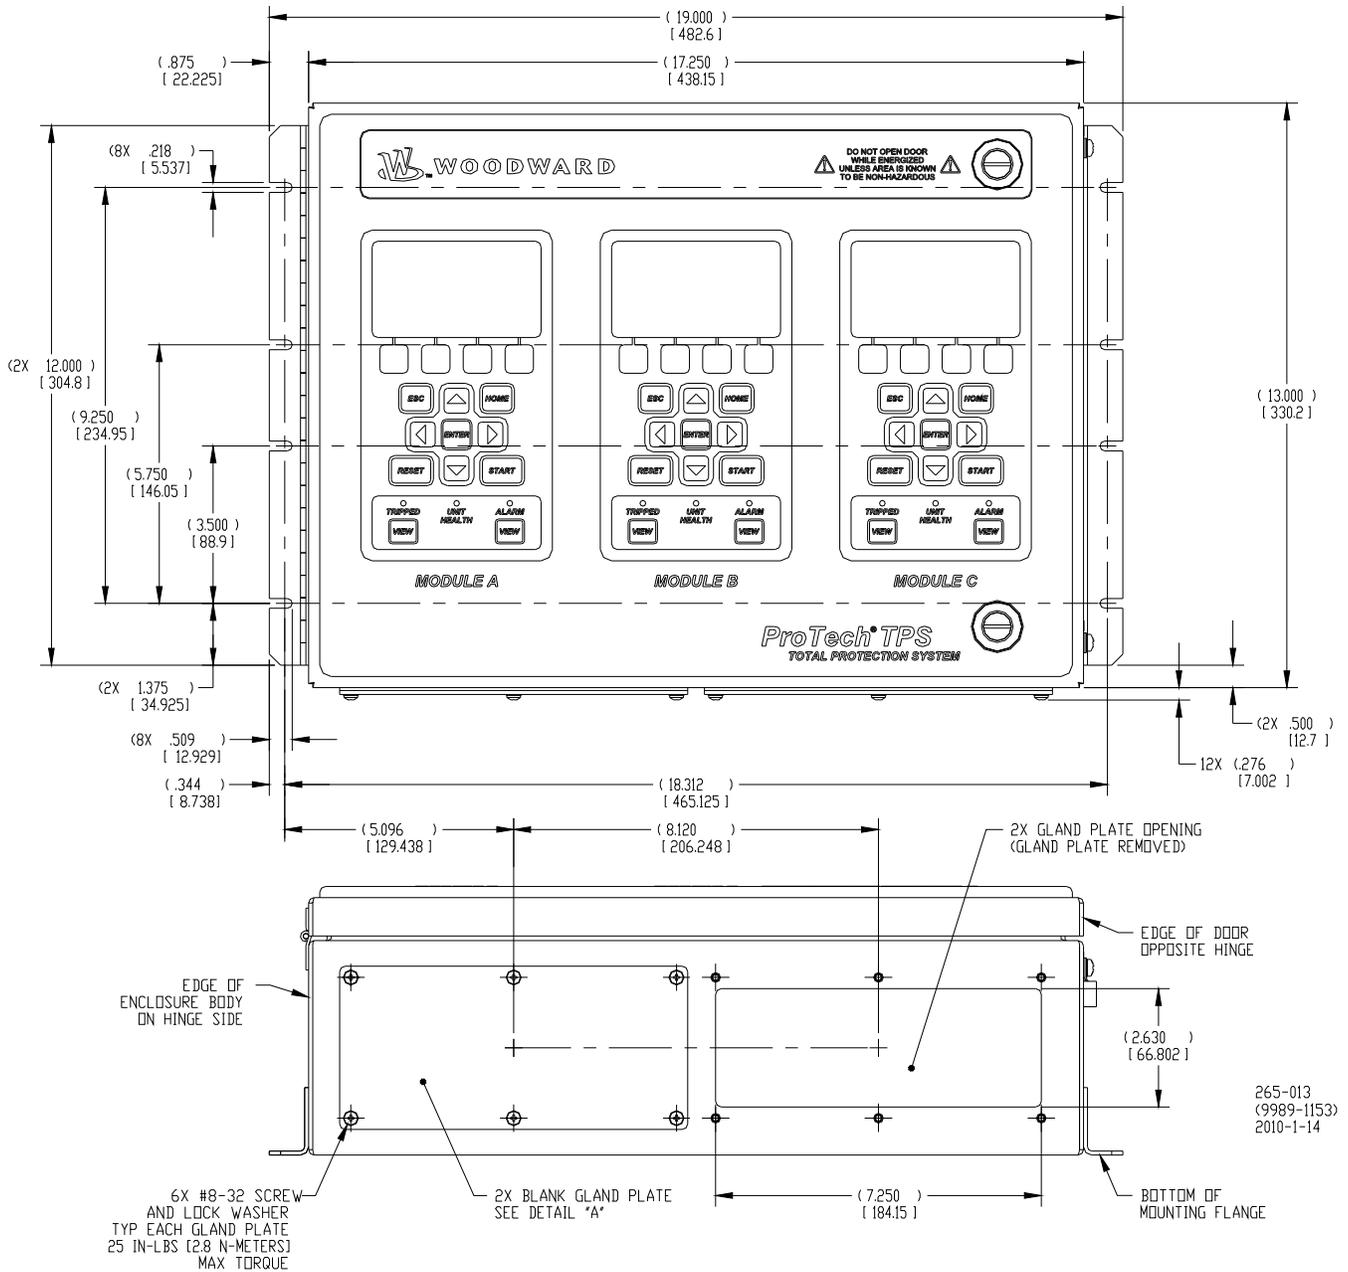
Mounting Outline Diagram for Bulkhead-Mounted Models
